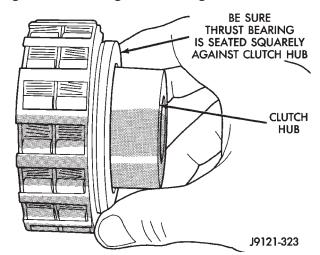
Installing Overrunning Clutch Thrust Bearing
